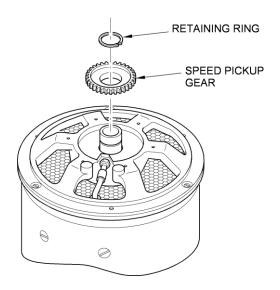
Installing Speed Pickup Gear and Retaining Ring onto Armature Shaft (Pre-Load)
